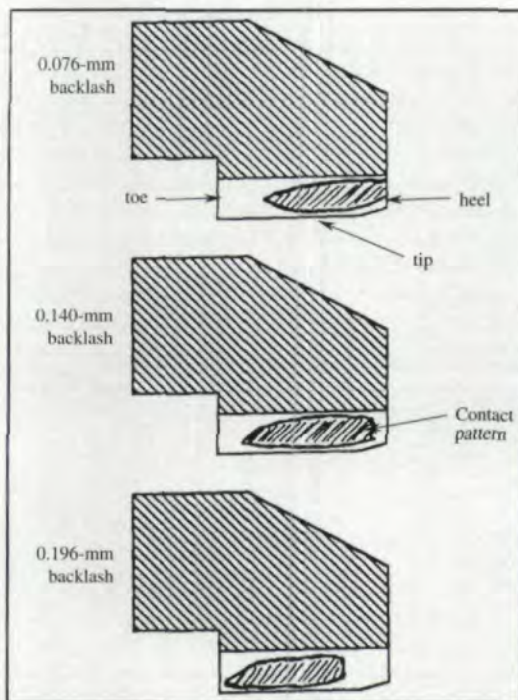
Effect of face-gear shimming and backlash on tooth contact pattern (test side face gear).
